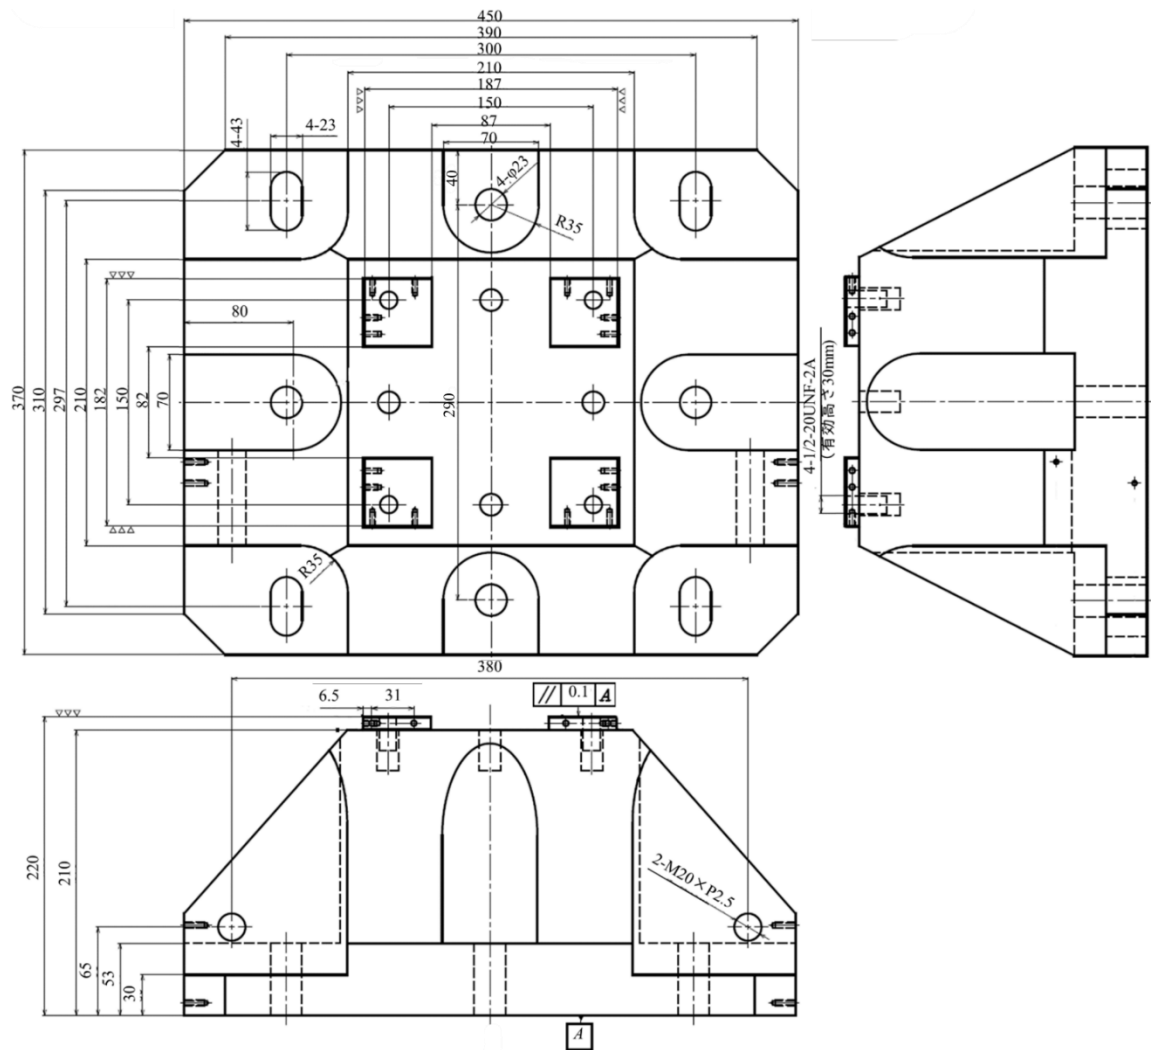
Drawing and dimensions of the steel body that is bolted to the surface plate to support the axle
